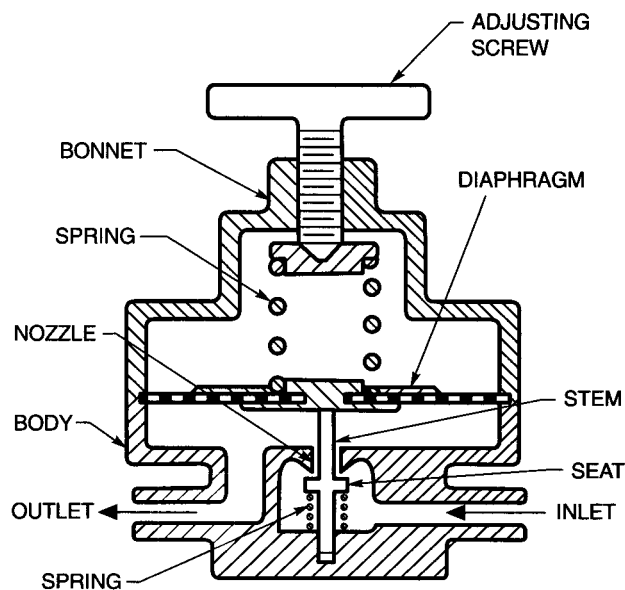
Cross-Sectional View of a Typical Single Stage Stem-Type Regulator
